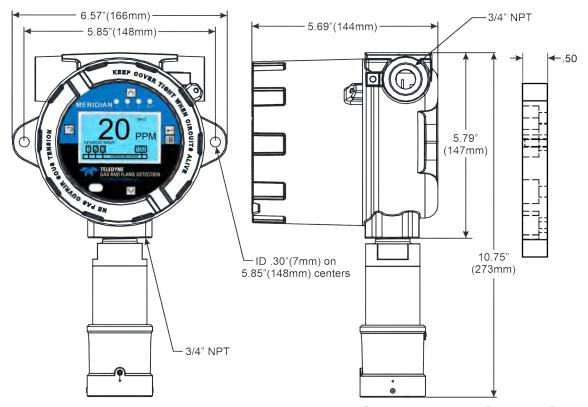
Device Mounting Dimensions - Aluminum & Stainless Steel
